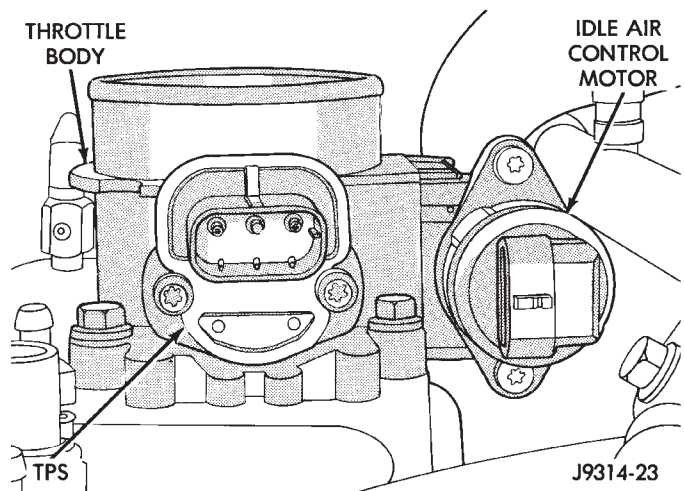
Idle Air Control Motor—Removal/Installation—Typical
